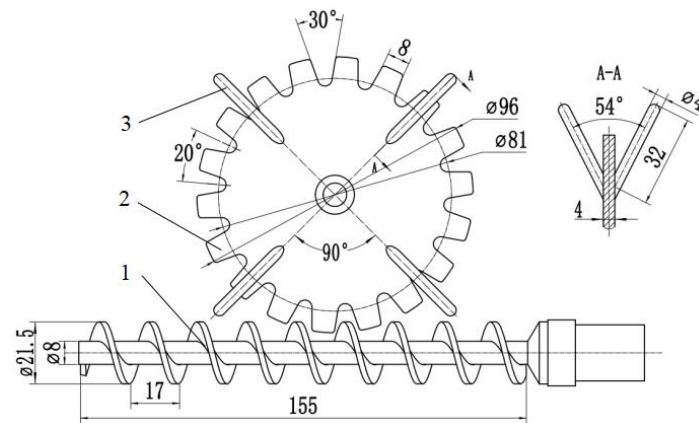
Seed stirring mechanism of seed feeder: 1. Auger. 2. Seed stirring wheel. 3. Seed stirring rod.
